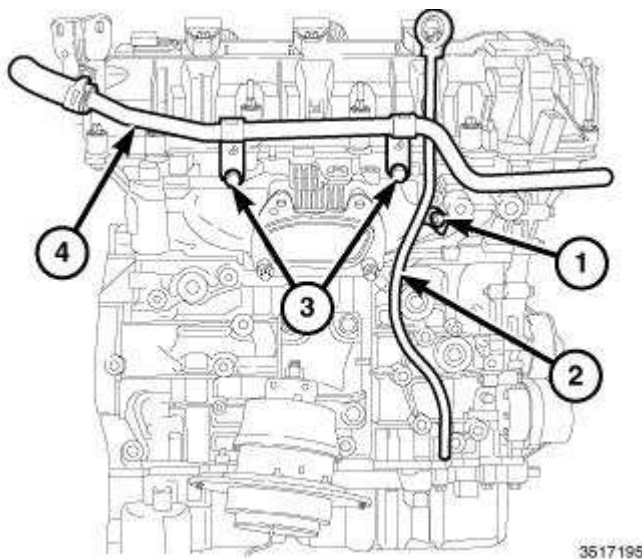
Heater Core Inlet Tube, Oil Level Indicator & Bolts
